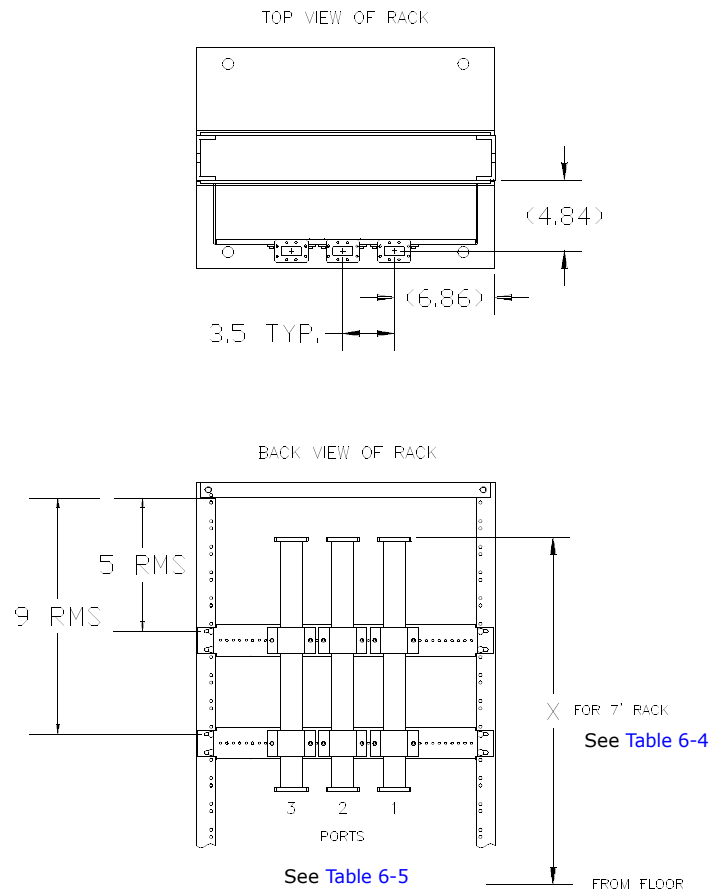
ACU, hot-standby/frequency-diversity 2-antenna (T/R, T/R) (front view), mechanical drawing
